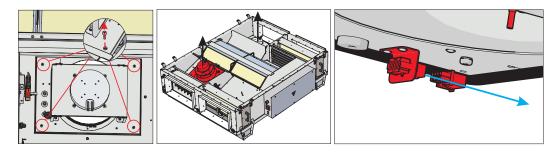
AmbertAir Compact 1 CX P floor-mounted version
